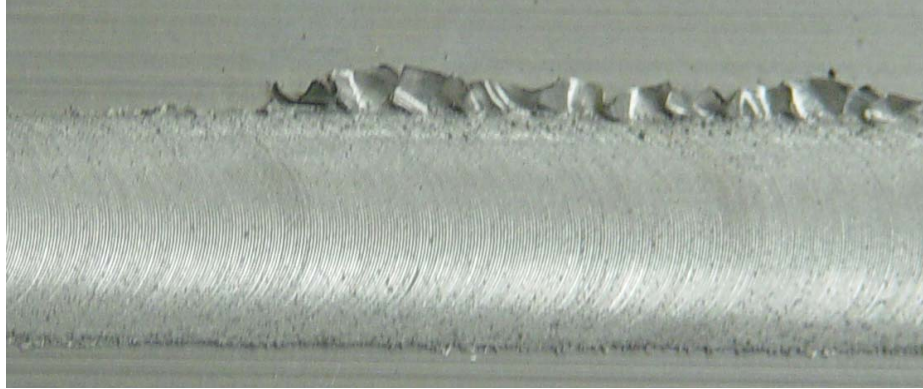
Weld Surface for 3500 rpm and 30 ipm.
